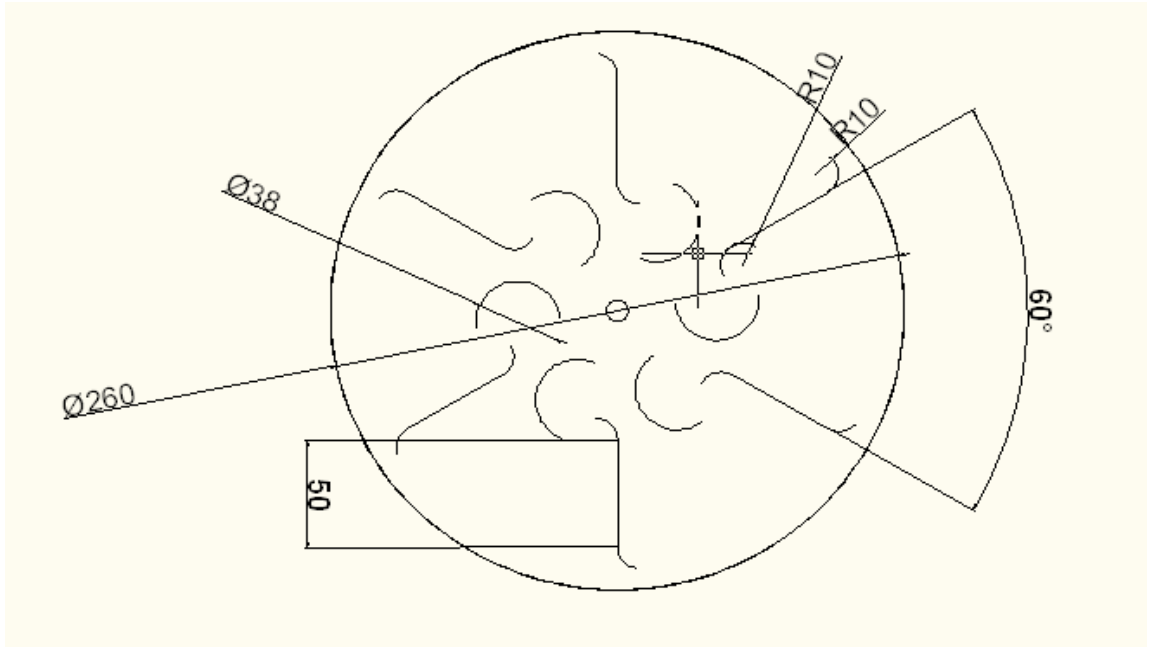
Cross section view with dimensions in millimetres (mm)
